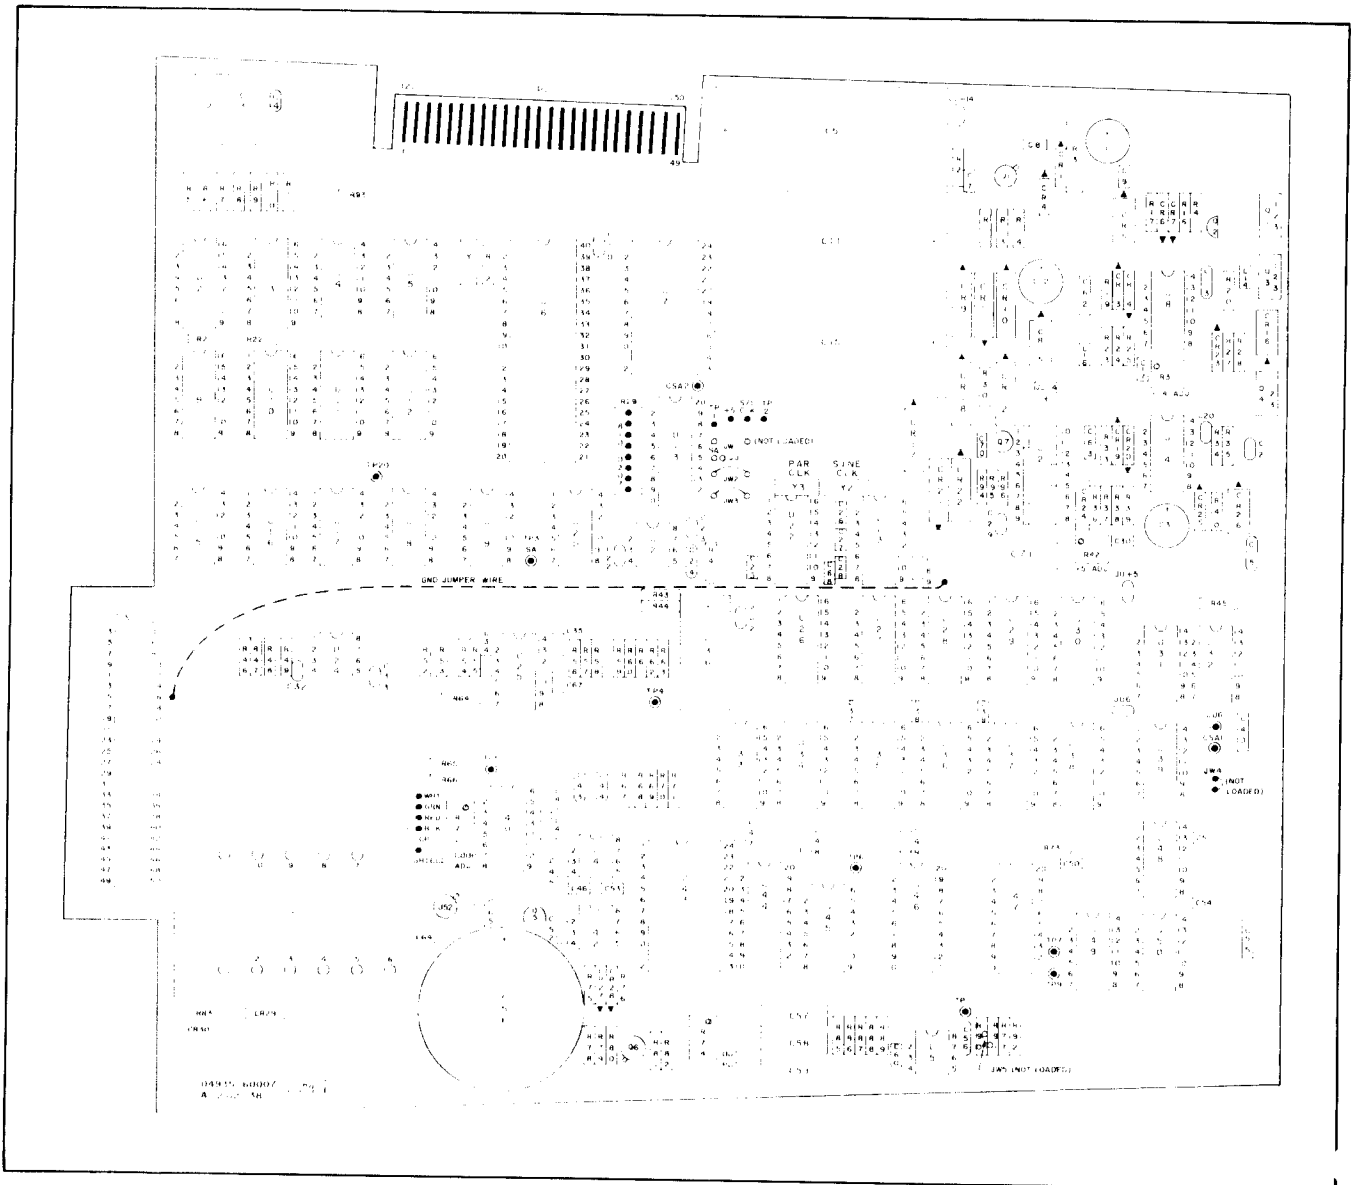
A14 P/AR Transmitter Board Component Locator
